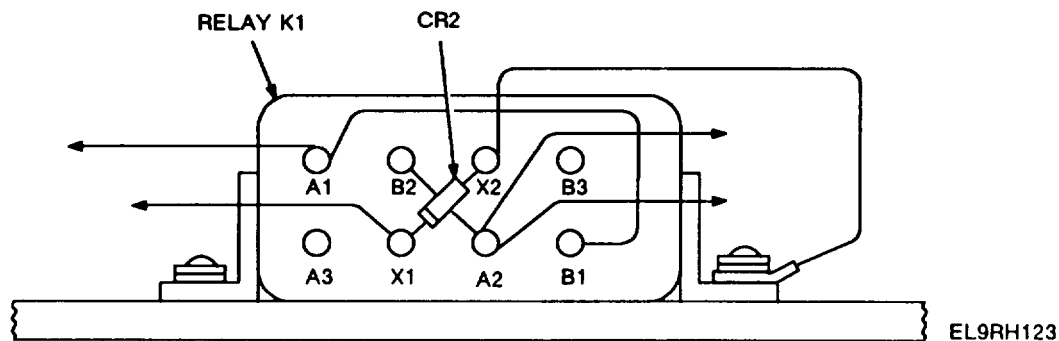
Relay K1 and Diode CR2 Mounting Detail
